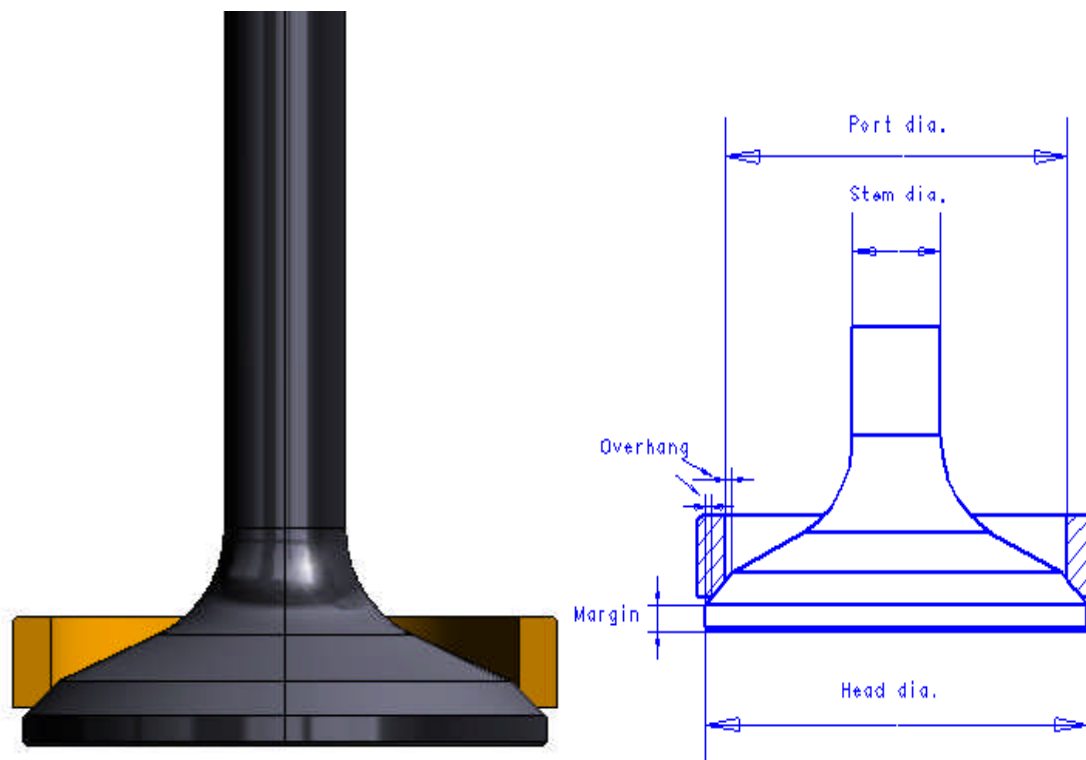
Valve and valve seat 3D detail and 2D drawing showing valve head margin and overhang definitions
